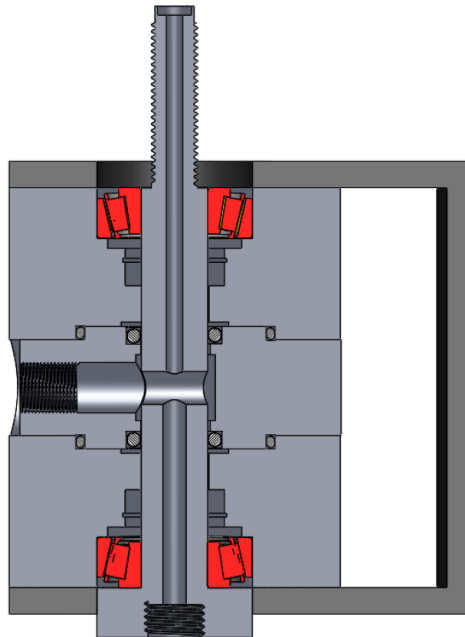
Cross-section of hydraulic swivel. Top and bottom roller bearings shown in red.
